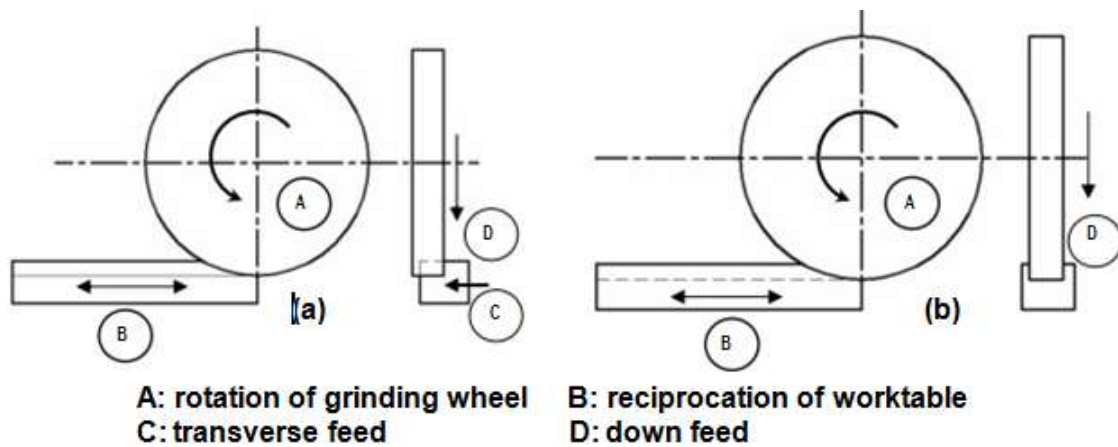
Surface grinding (a) traverse grinding (b) plunge grinding
